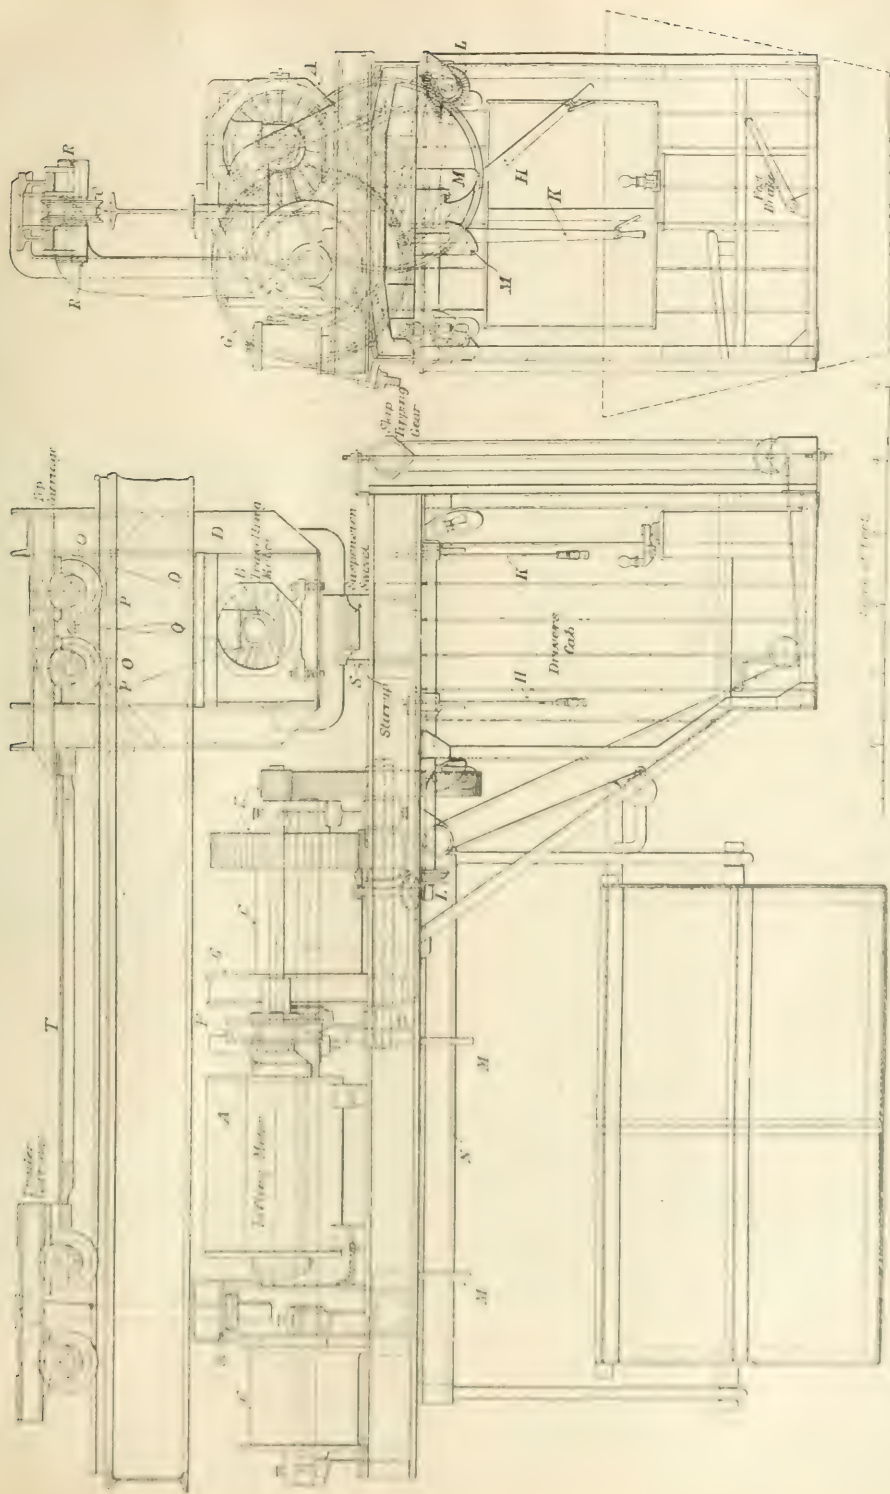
ELECTRIC MOTOR OF THE H. H. H. TYPE, AS SHOWN IN THE DRAWING.
